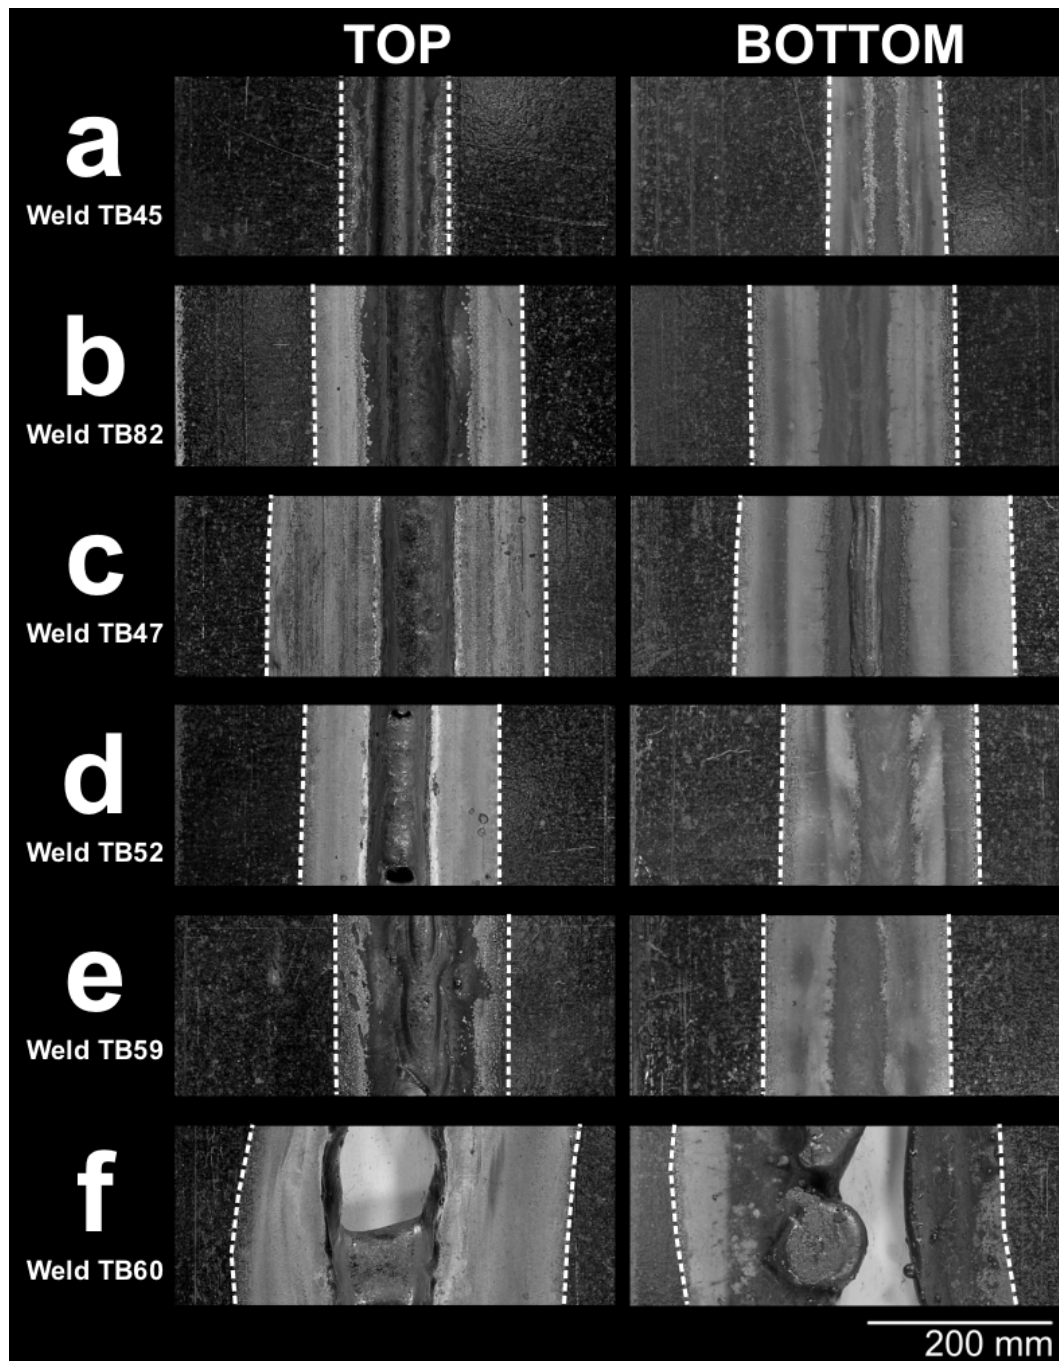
Example welds from the Phase 1 welding trials. Shown are a) a weld that had lack of penetration, b) a weld that had good bead geometry and sufficient root penetration, c) a weld that had excessive penetration, d) a weld that had porosity, e) weld with intermittent bead geometry, and f) a weld that had burn-through.
